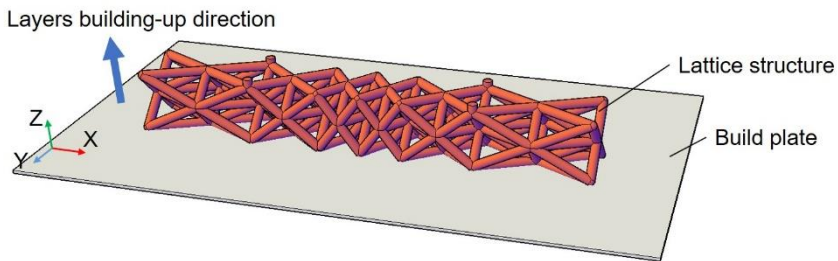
Lattice structure orientation on the building plate and layers building-up direction
